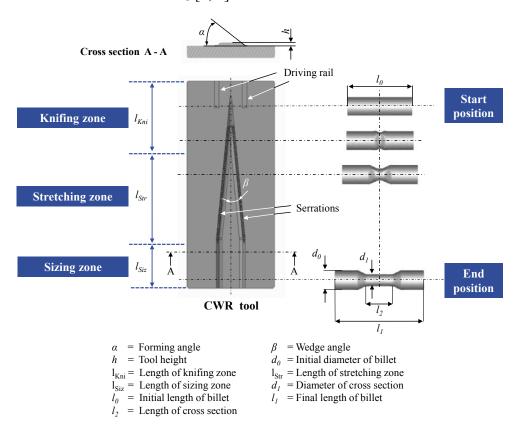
Important geometric parameters of a three zones flat cross wedge tool.
